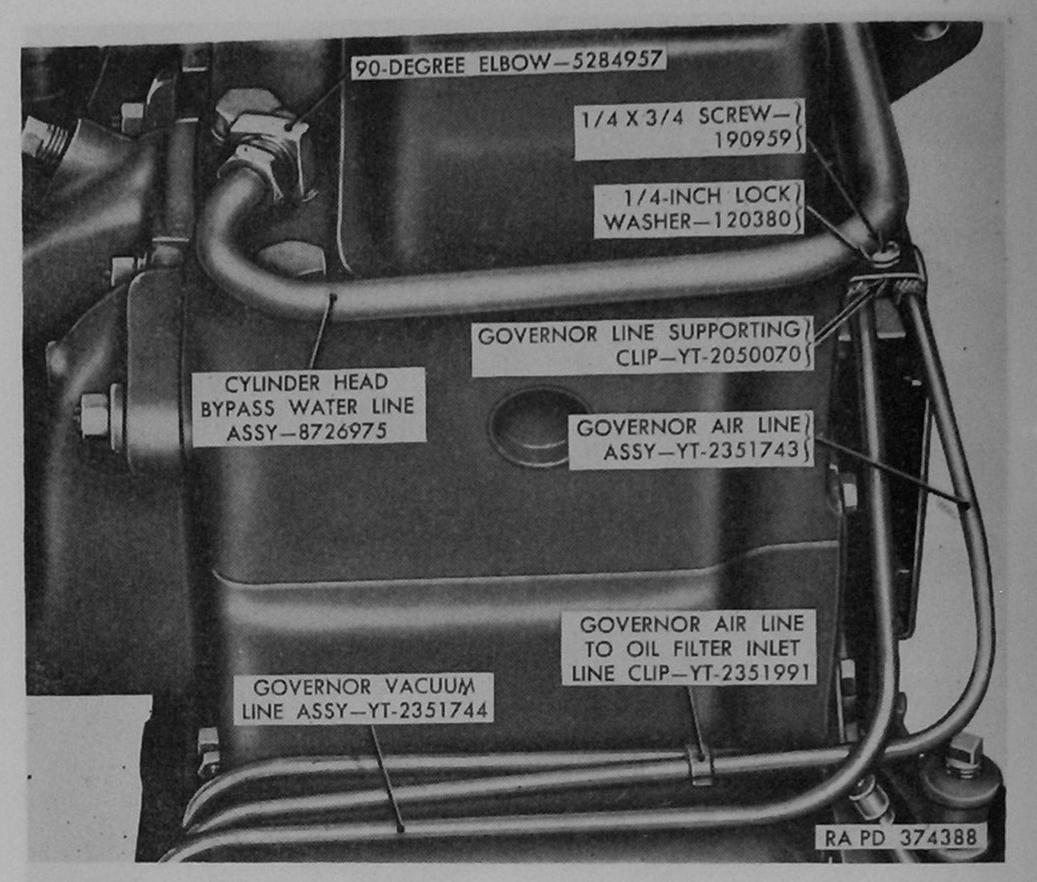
Location of governor line clips and cylinder head bypass water line—engine assembly 8726920.
